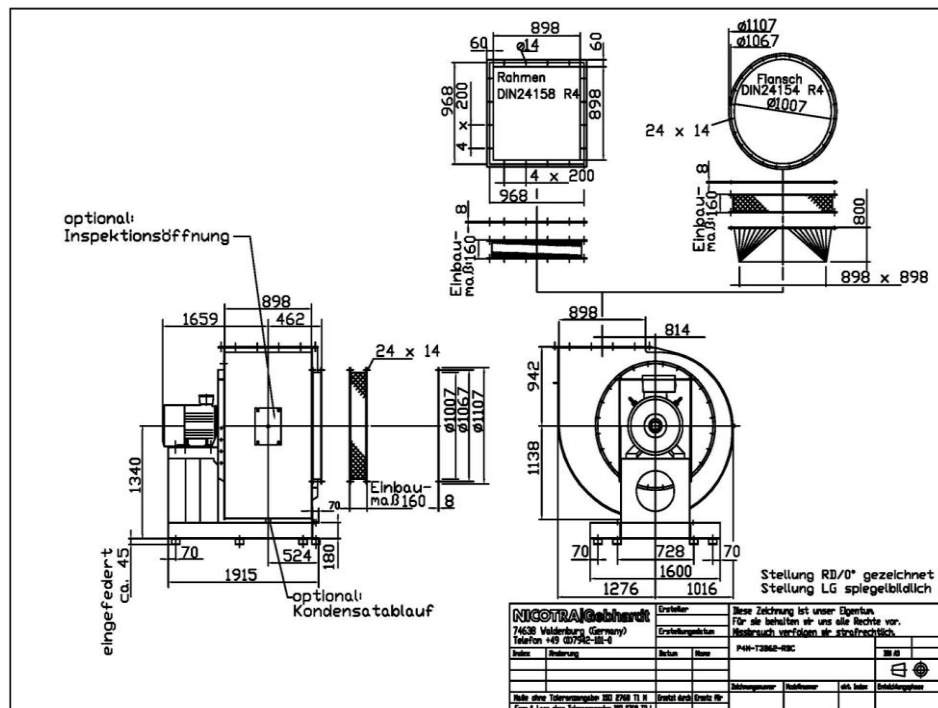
Drawing with built-in dimensions of the fan P4M-T3B62-RBC
